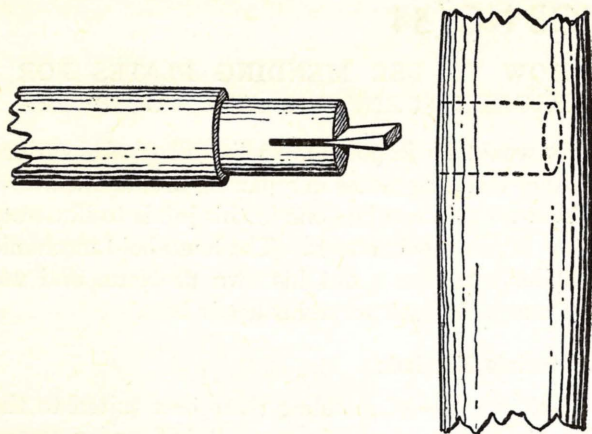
A slot may be sawed in the end about one half inch deep, and a hardwood wedge cut the same length that will spread the end when the tenon is driven in
